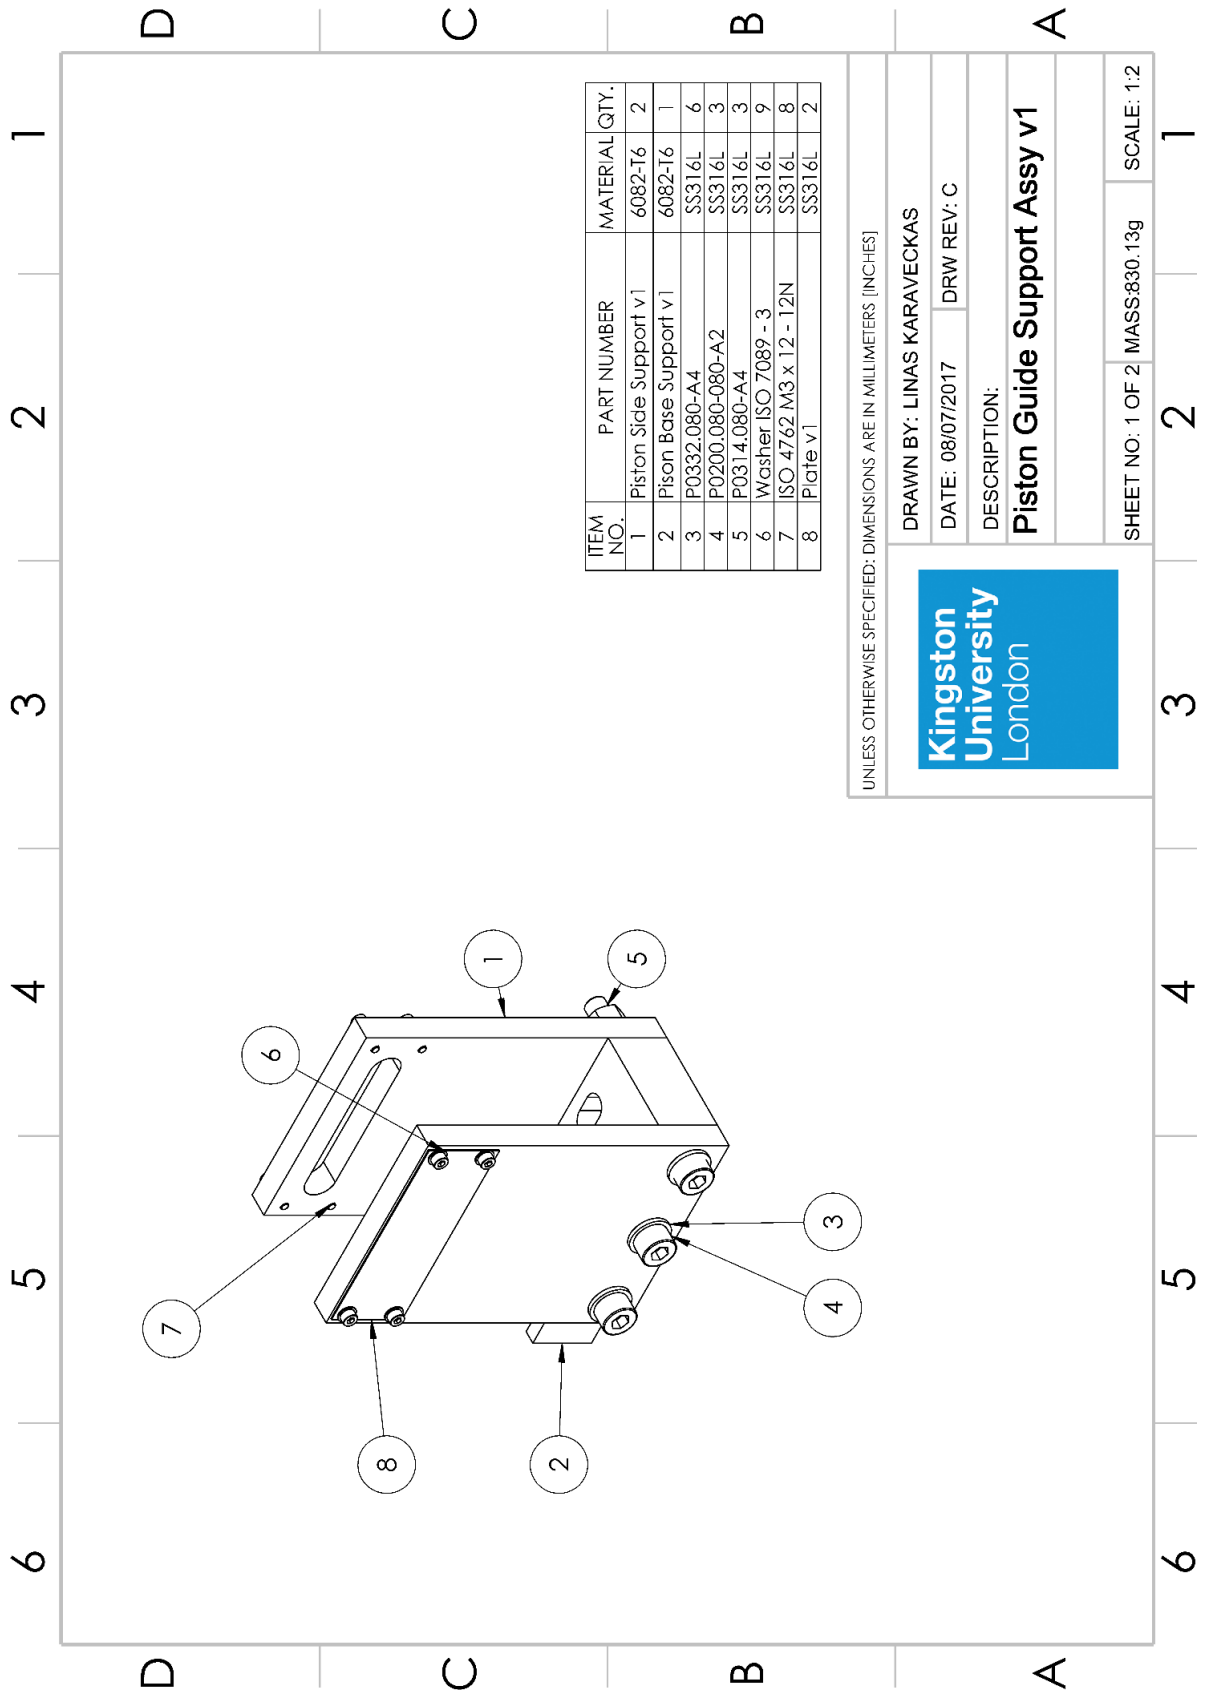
Mark II Piston Guide Support Assembly Drawing, Pg.1
